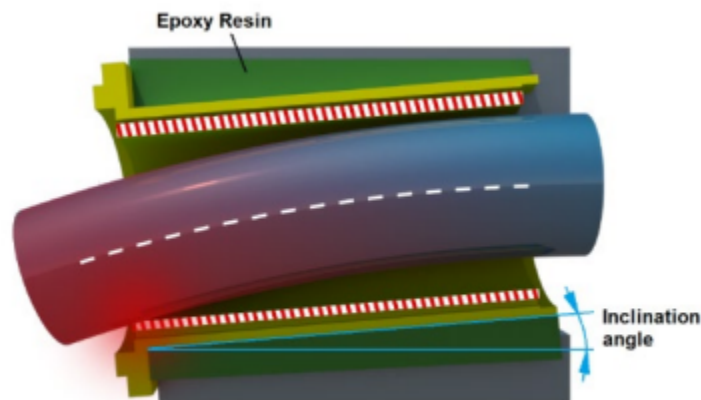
BEARING INCLINATION AND CHOKE IN STERN TUBE [2]
